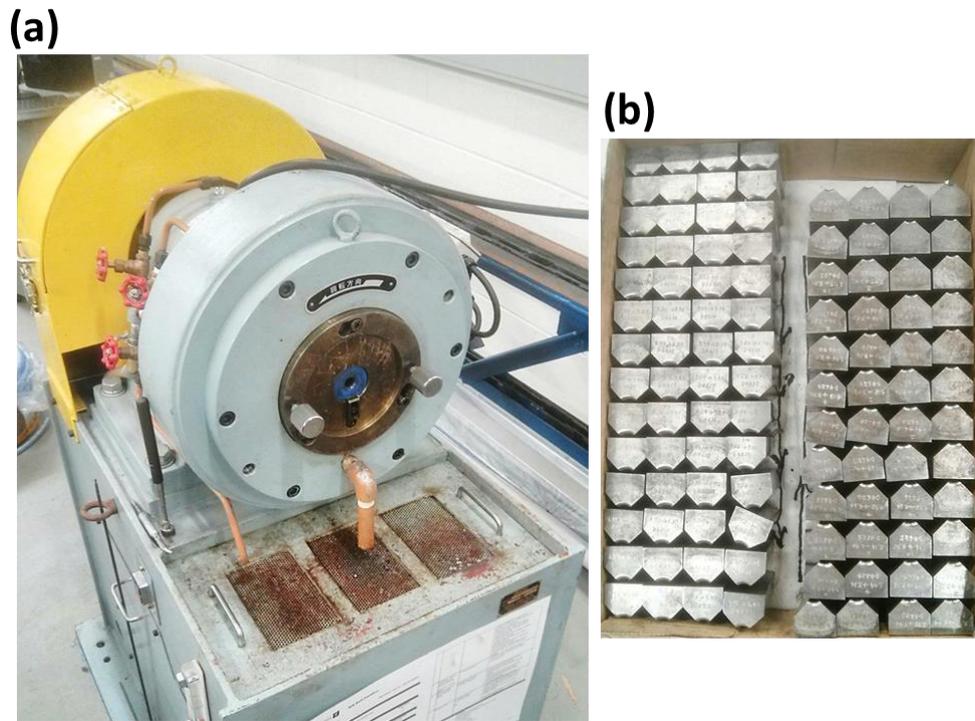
(a) Big swaging machine to swage wire to 3 mm, (b) big swaging machine dies.
